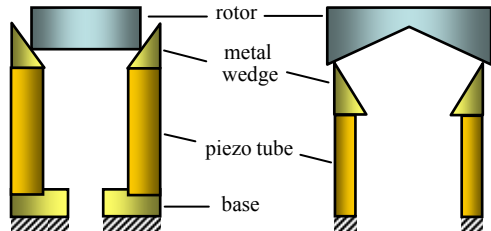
Cross-sectional view of prototype motor 1 (left) and 2 (right)
